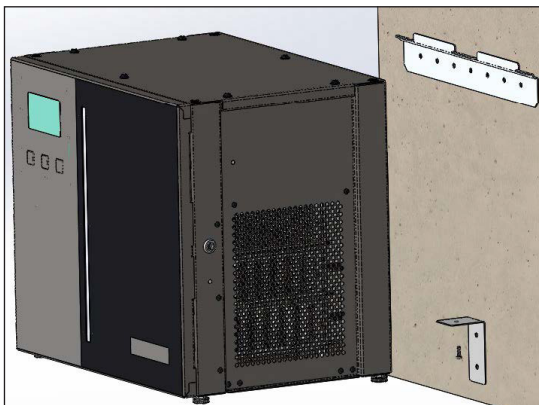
Charger, Wall Mount Hanger, Bottom Bracket and M5 Screw
